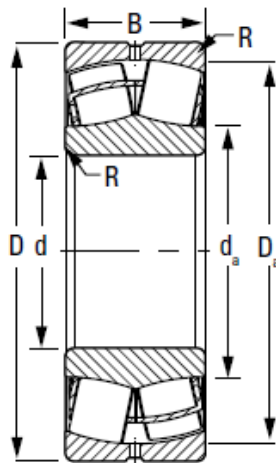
Basic dimensions of the TIMKEN spherical roller bearing
